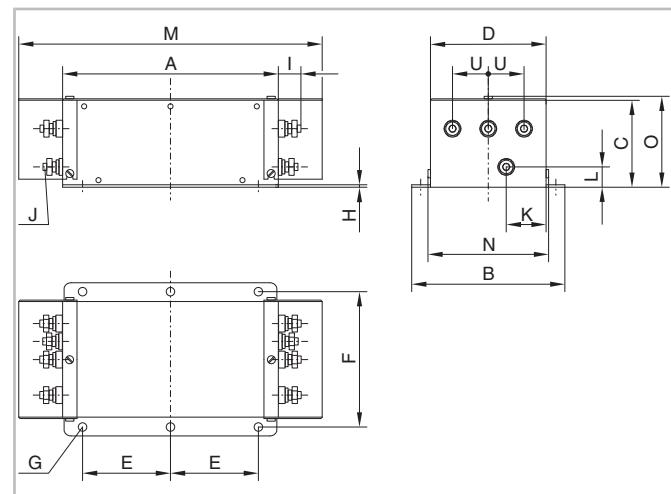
Dimension drawing of RFI filter 3259-250-28
